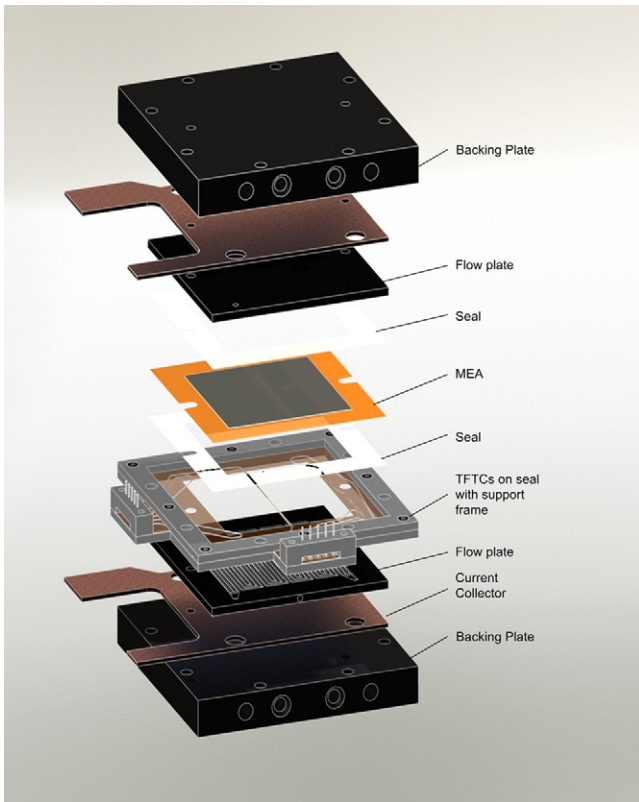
Schematic view of embedding TFTCs seal assembly inside fuel cell test rig.
